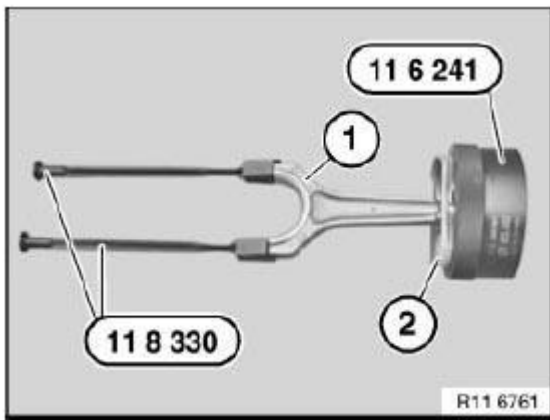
Identifying Piston And Connecting Rod With Special Tools (11 8 330 And 11 6 241)
